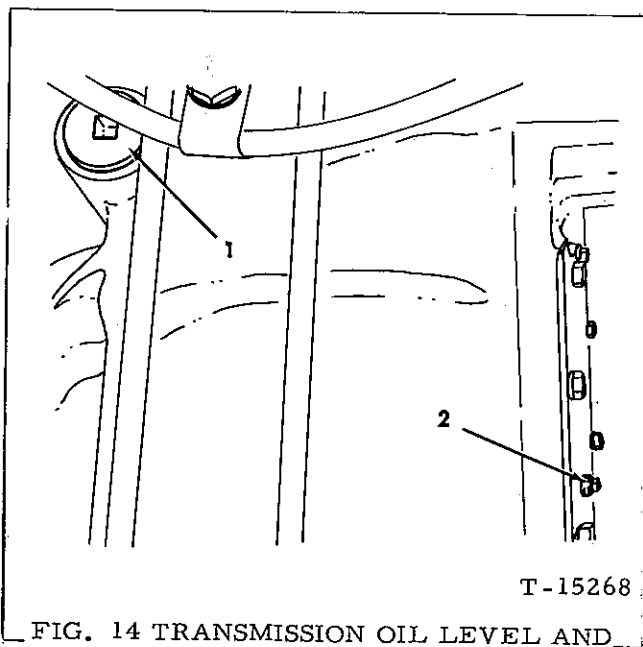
TRANSMISSION OIL LEVEL AND FILLER PLUG
